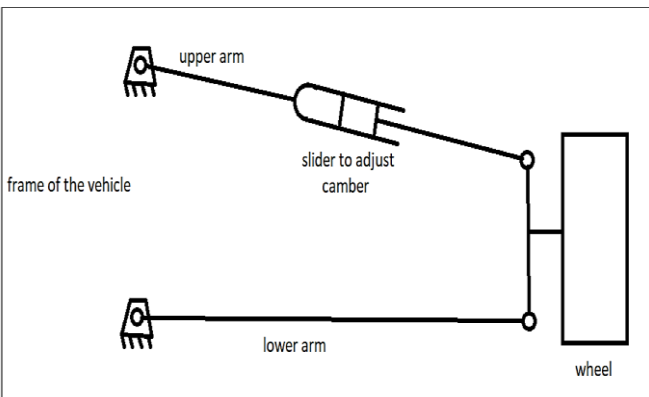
illustrates a kinematic diagram of camber adjustment mechanism.
